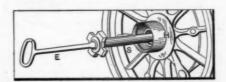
Showing how the jackshafts can be withdrawn from a full floating axle and the style of tool used for the purpose
